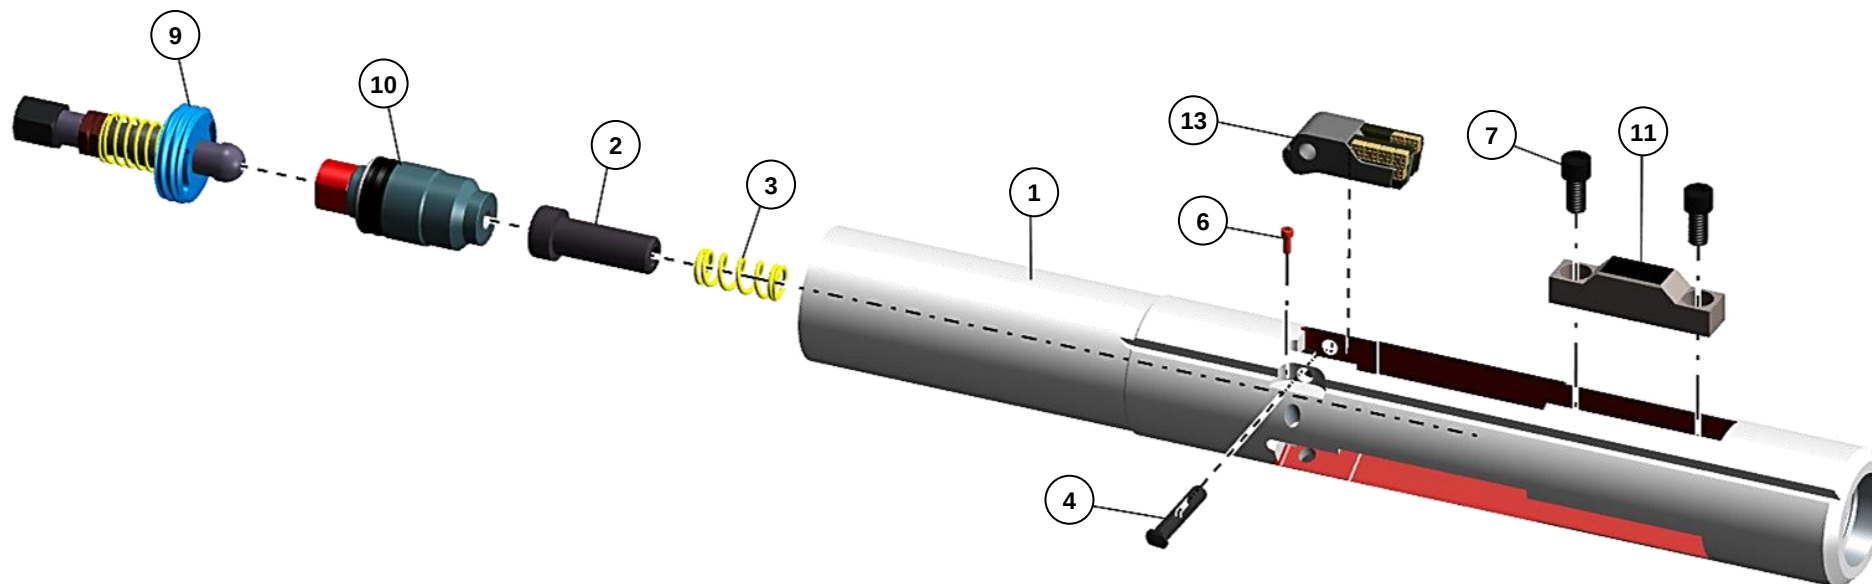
3.625 & 4.25 OD M23 Cutter Assembly
